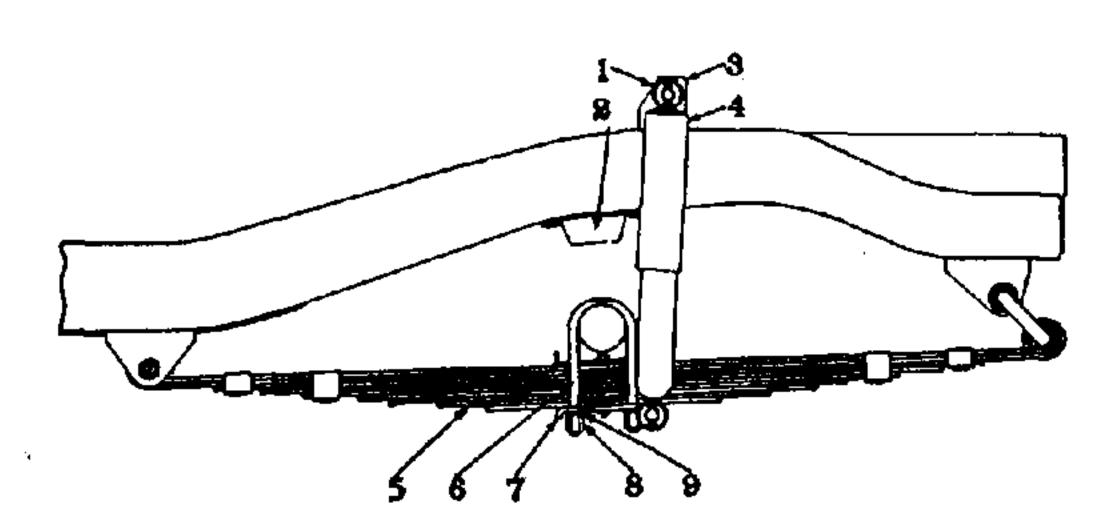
REAR SPRING AND SHOCK ABSORBER
